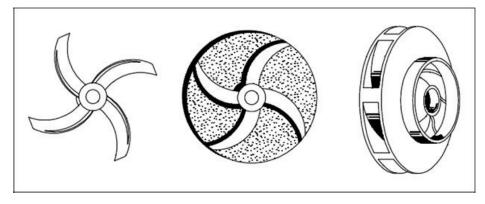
Open, Semi-Open, and Enclosed Impeller Blade Designs [23, Reproduced without permission]
